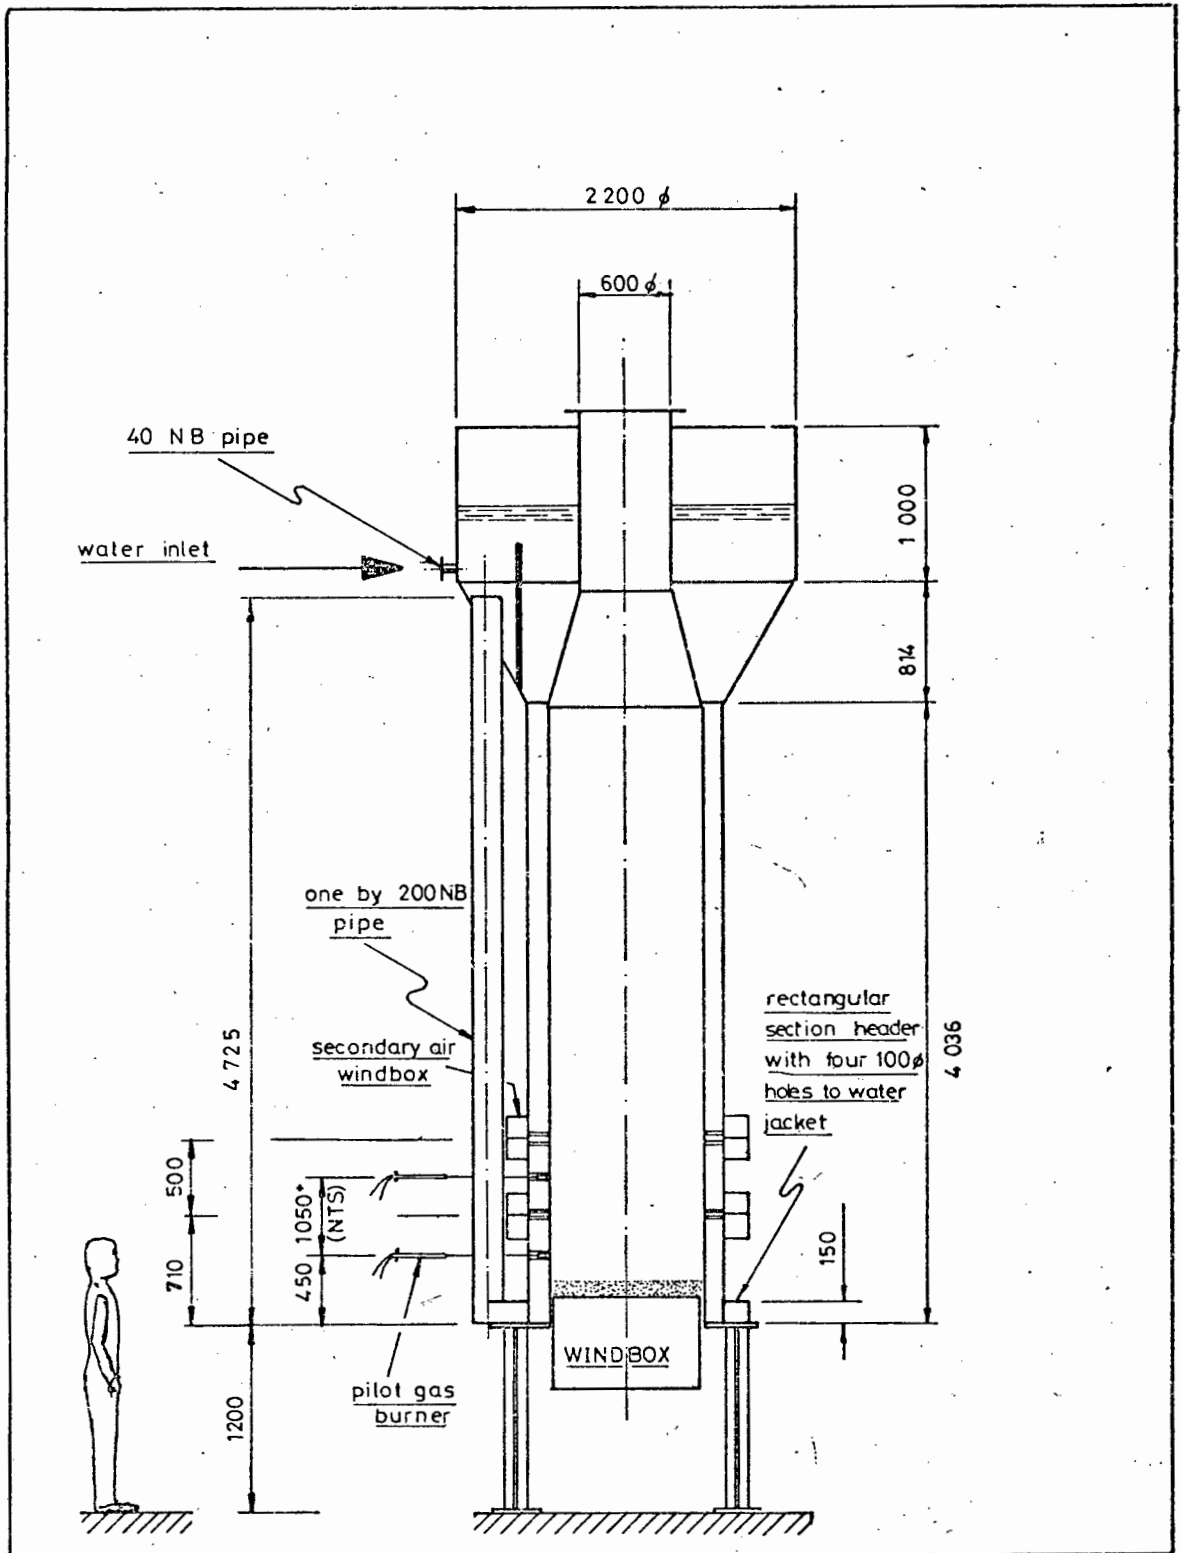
Cross section of combustor vessel to illustrate the general arrangement of the vessel
